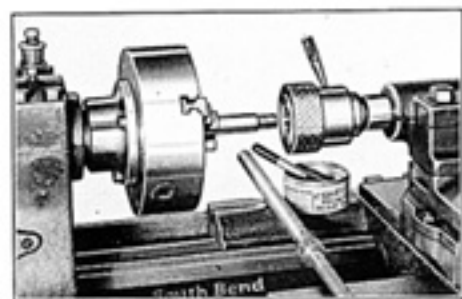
Die mounted on lathe carriage for cutting accurate threads.
